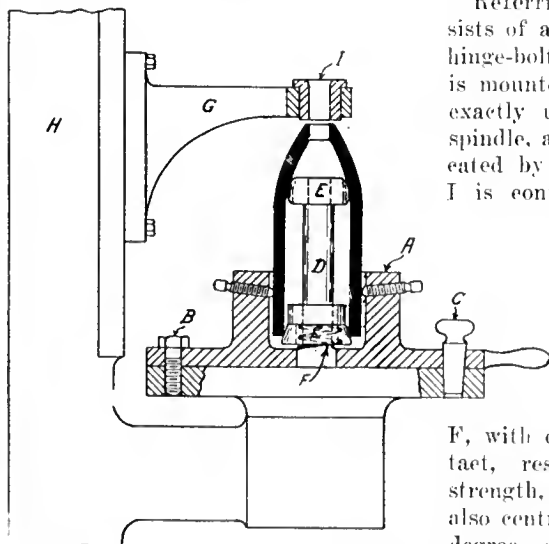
FIXTURE FOR CENTERING AND DRILLING SHELL FORGINGS IN DRILL PRESS
